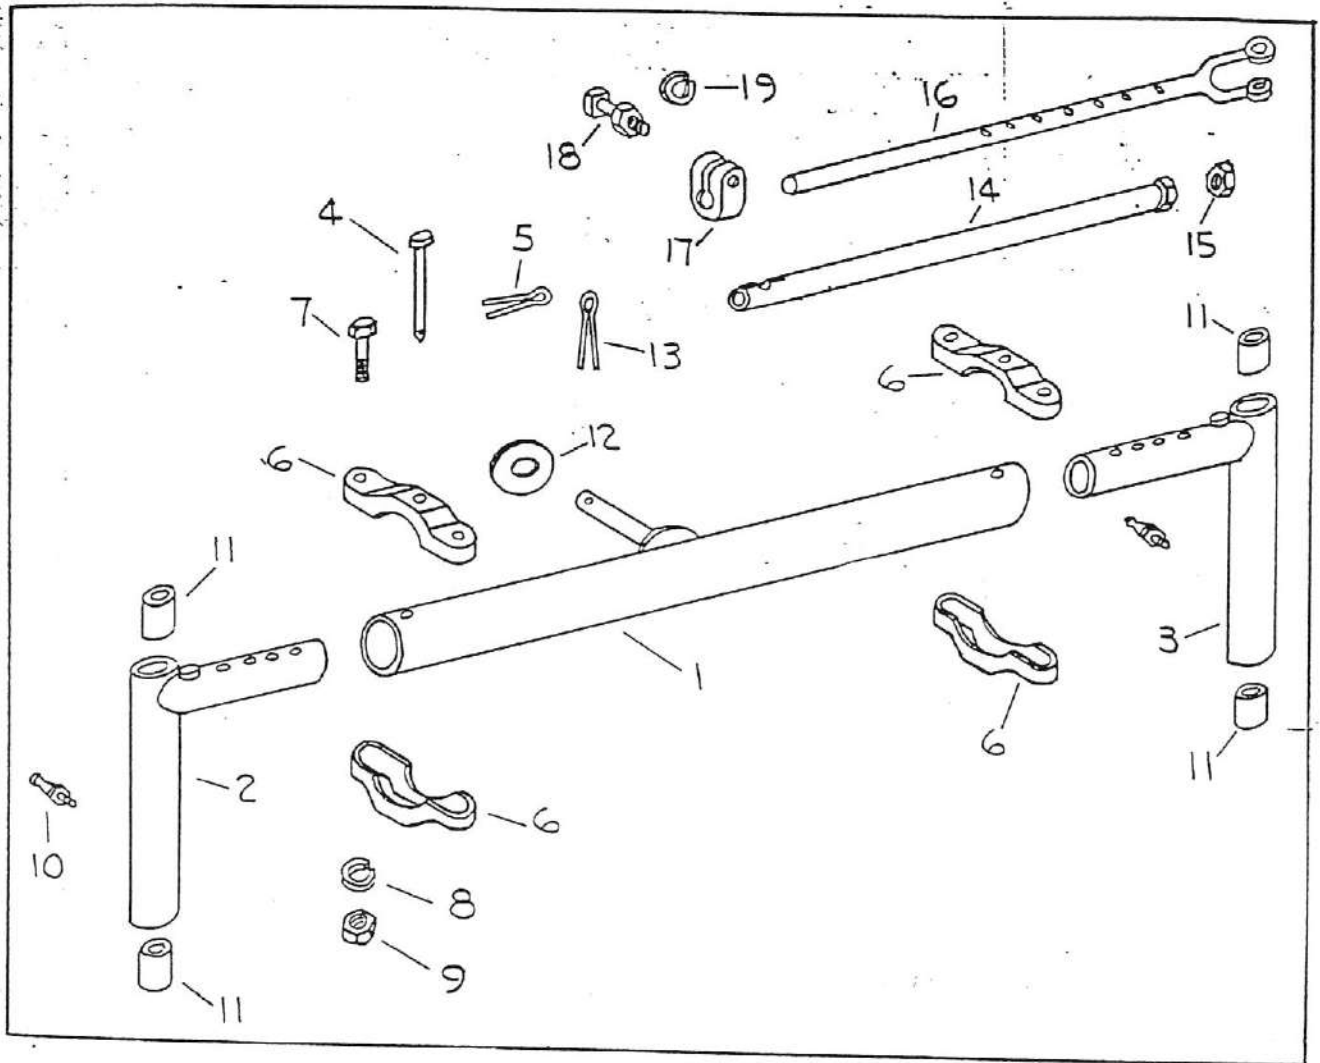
Adjustable Front Axle & Tie Rod Assembly
